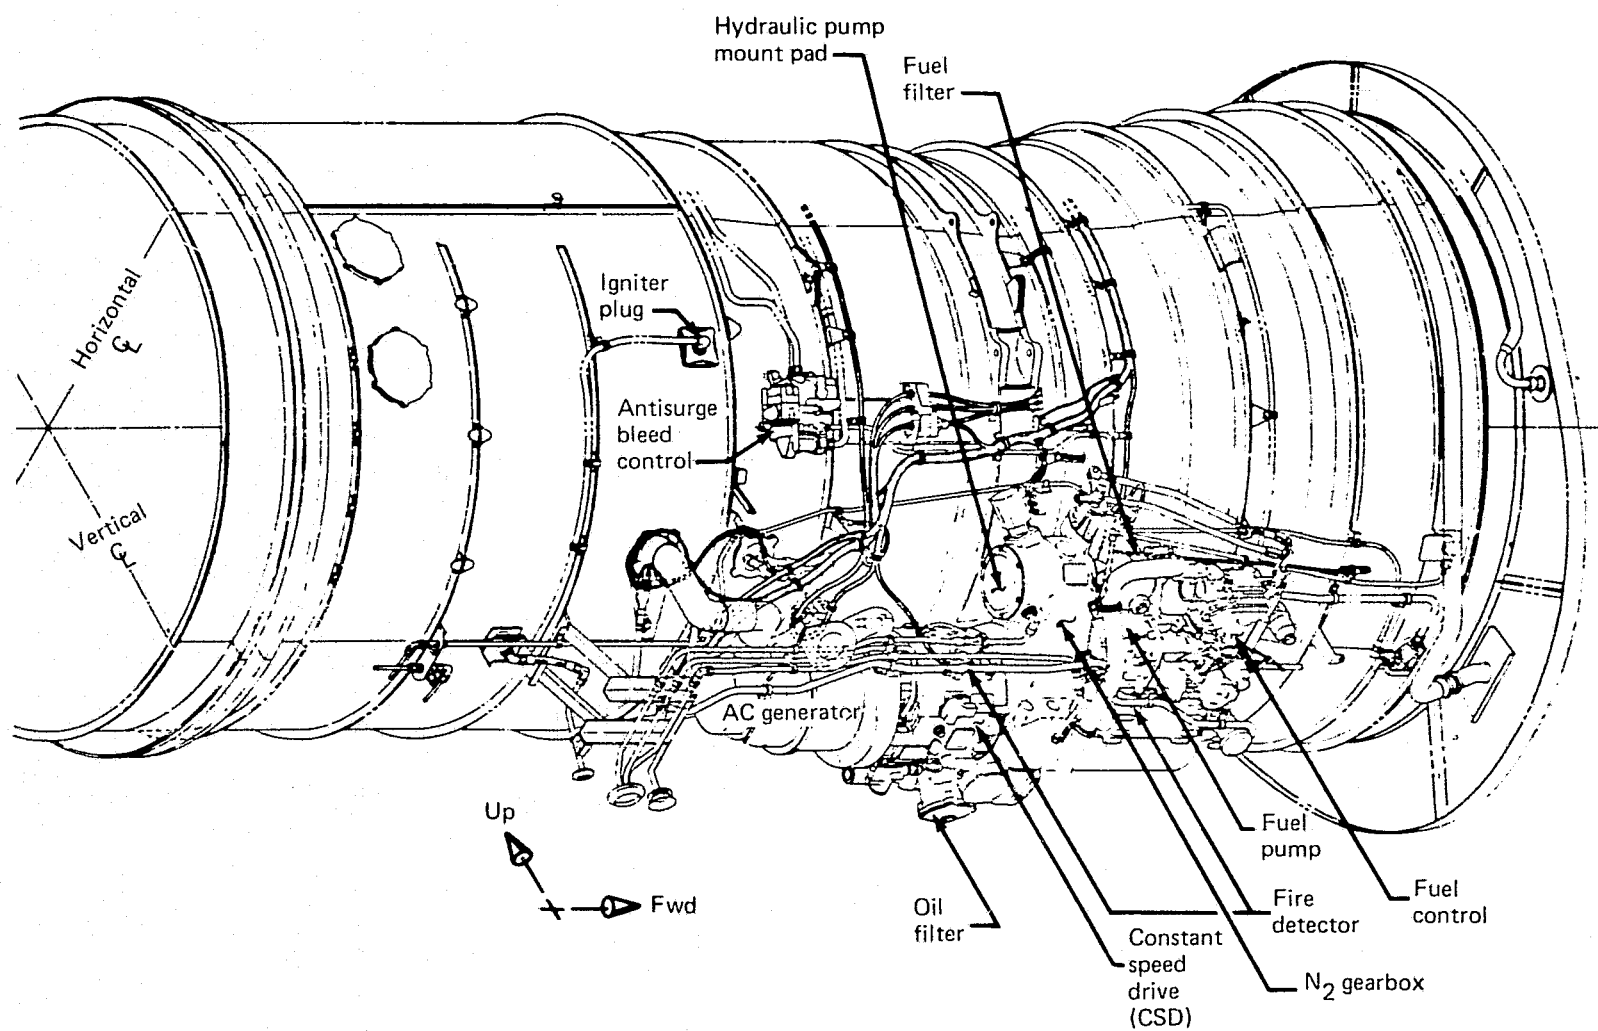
JT8D Refan Powerpack Assembly—Lower Right-Hand Side
